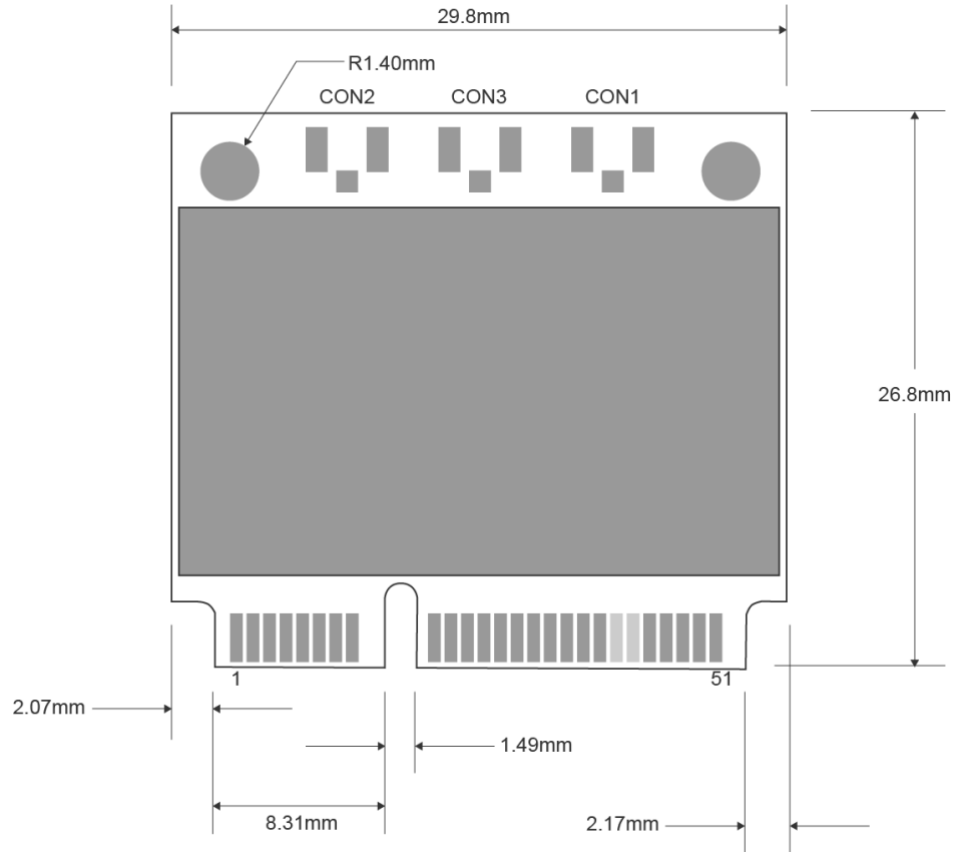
Recommended PCB Footprint of BW2570-PCIE
